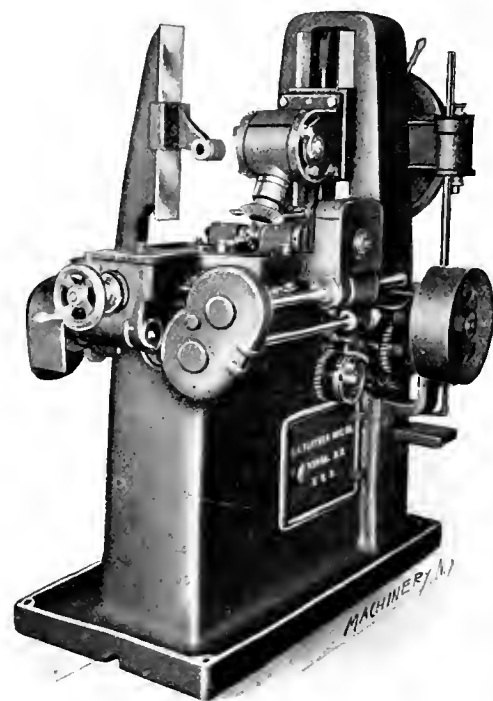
An Attachment to the Flather Automatic Spur Gear Cutter for the Cutting of Bevel Gears.
